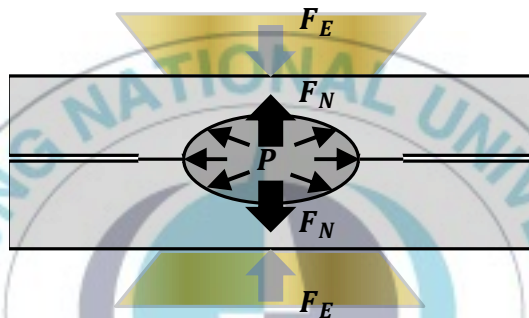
Major forces acting on the weldment during welding
